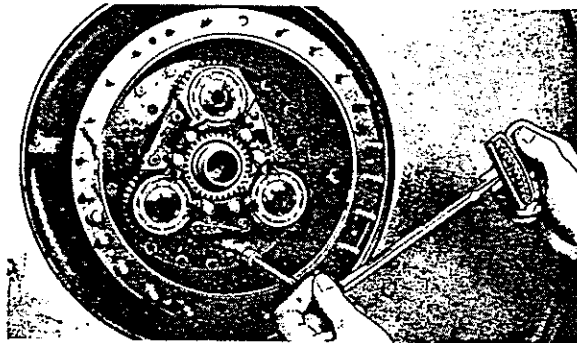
Securing Torquemeter Carrier and Gear to Planetary Sun Gear
